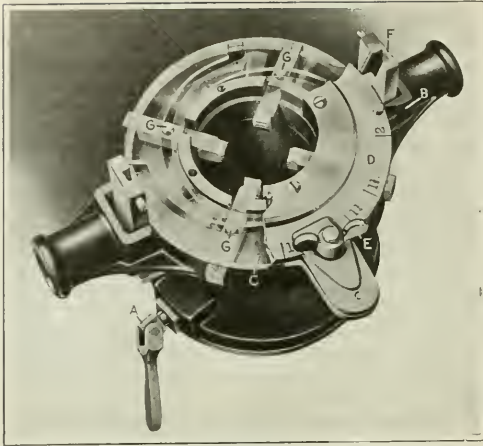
Adjustable Die-stock for cutting Taper Threads on 1, 1 1/4, 1 1/2, and 2-inch Pipe
